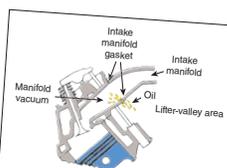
Oil can be drawn into the intake manifold past a faulty manifold gasket.
